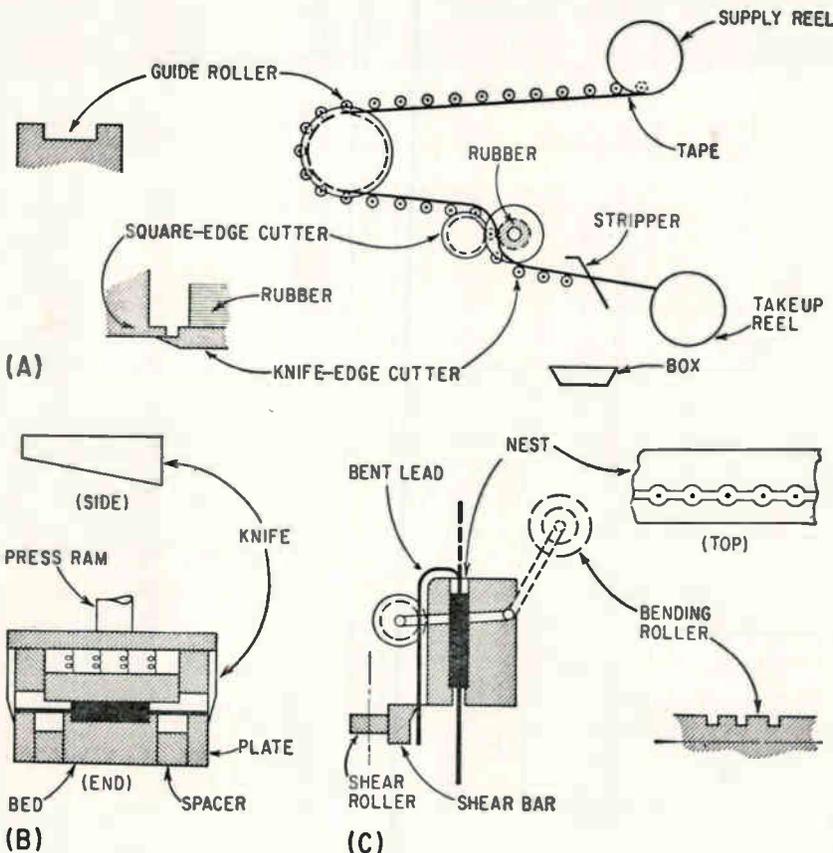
Sketches illustrate the operation of the roller-cutter for tape-packaged components (A), cutter (B) and cutter-bender (C) for strip-packaged components
